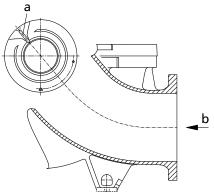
Position of the guide vane for shaft units DW 90 and DW 120
